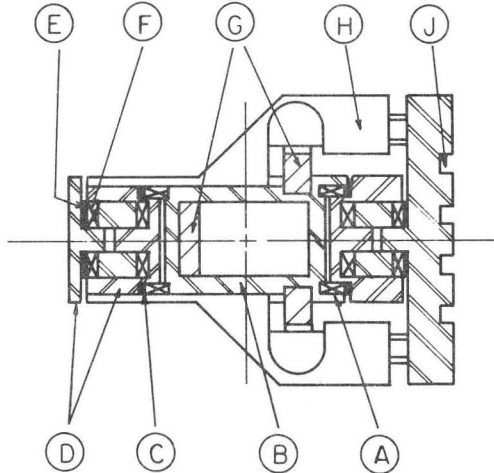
Channel 1 module cross section: A - pancake coils; B - box structure; C - copper rail; D - racetrack clamps; E - copper pressure plate; F - racetrack coil; G - iron focusing bars; H - clamping straps; J - location of external lap joint connections.
